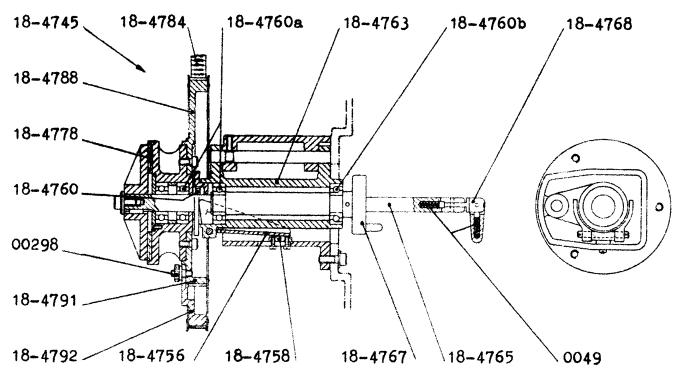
LOWER WEIGHT COMPENSATED TAKE-UP
